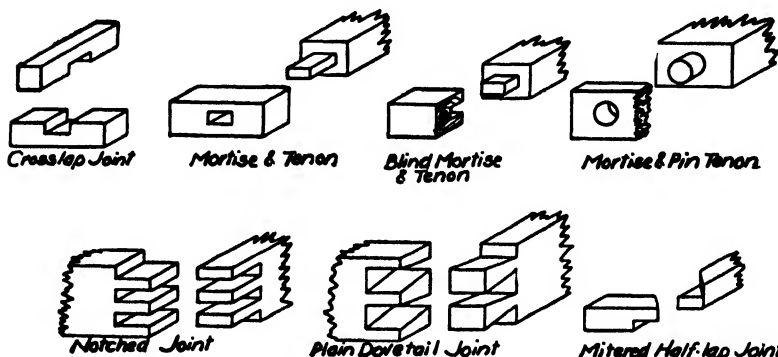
Joints Employed in Joinery and Cabinet-making.
